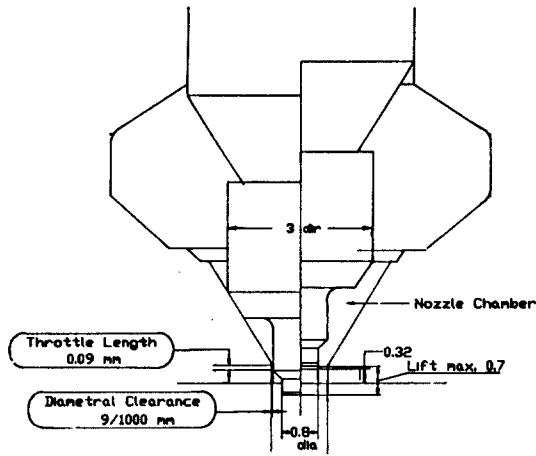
Cross Sectional View of Pintle Type Nozzle
